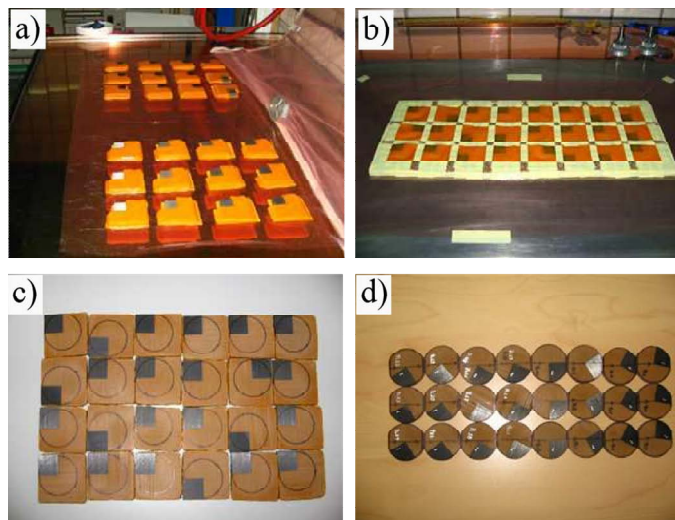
Manufacture of specimens. a) Adhesive film being layered; b) Cork covered with high temperature tape delimitating the region; c) After curing, specimens are like “cookies” and d) Final geometry of samples.
